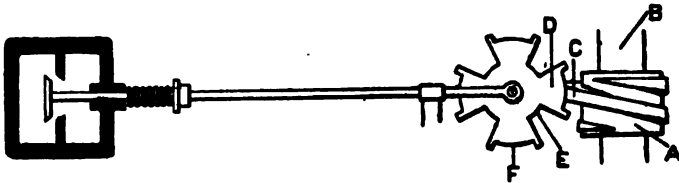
VALVES OPERATED BY WORM WHEEL CAM.
